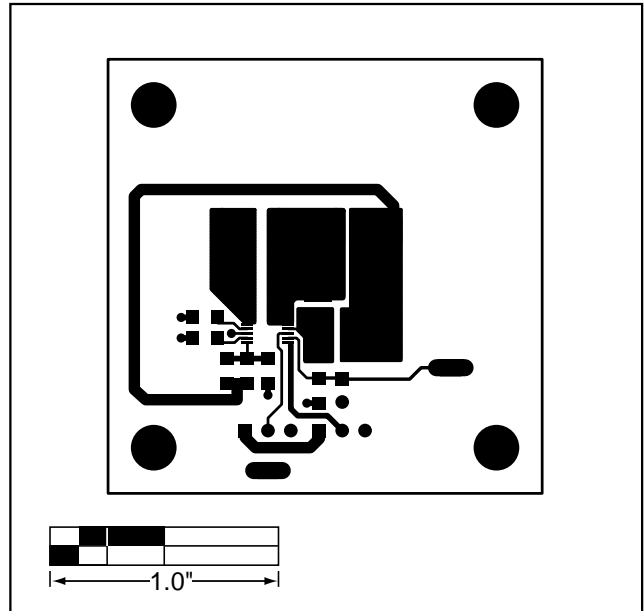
MAX1692 EV Kit PC Board Layout—Component Side
